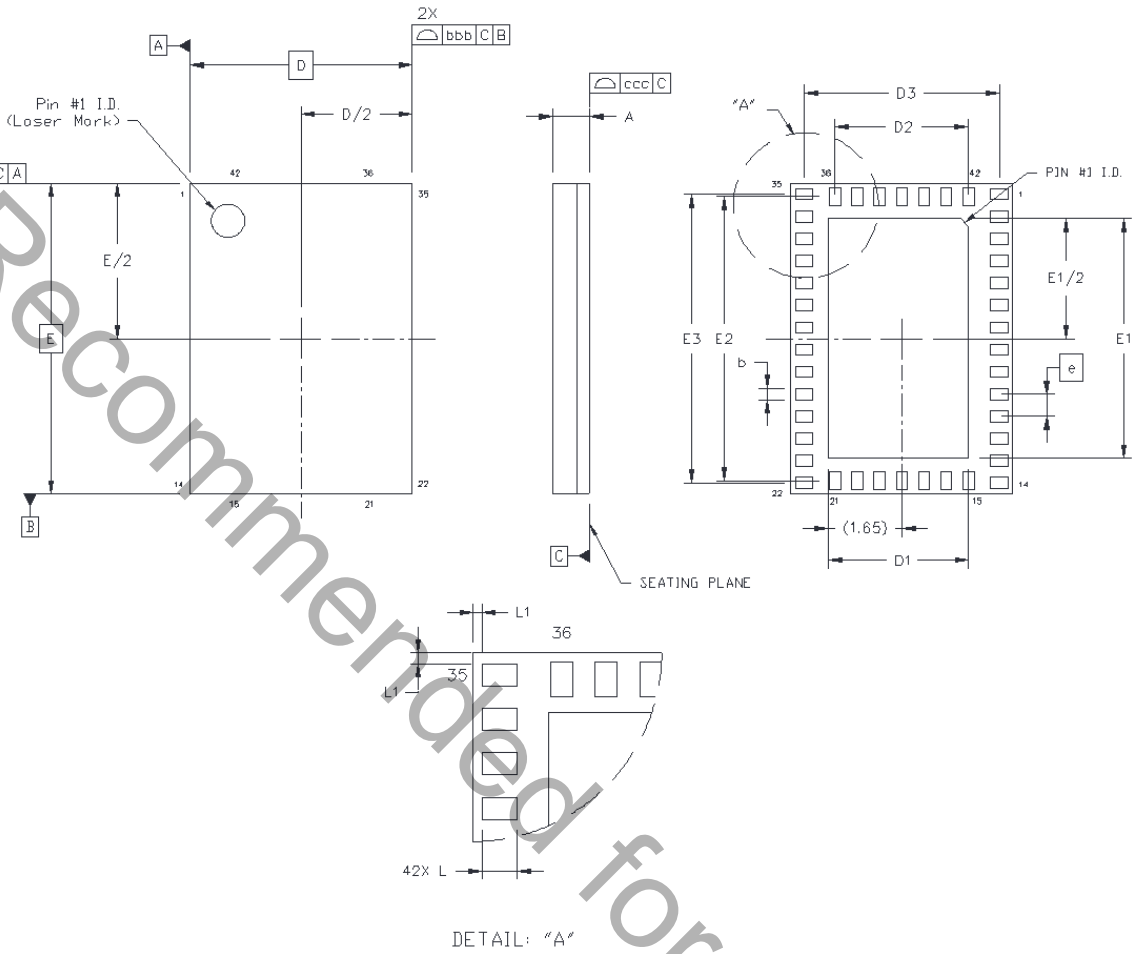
LGA-42 Package Drawing (Si1010/1/2/3/4/5-C-GM2)
